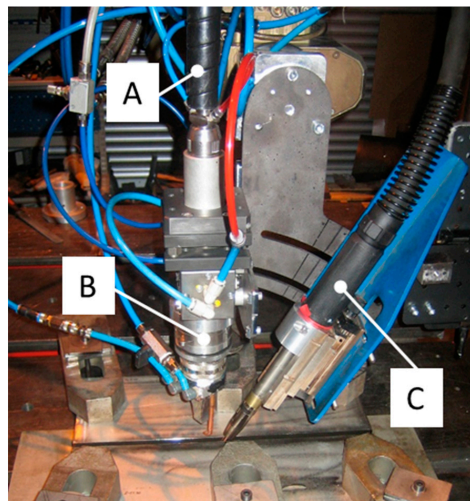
Welding head set-up used in the laser-arc hybrid and laser cold-wire experiments. (A) process fibre with connector; (B) laser welding head-unit; (C) adjustable gas metal arc welding (GMAW) torch unit.
